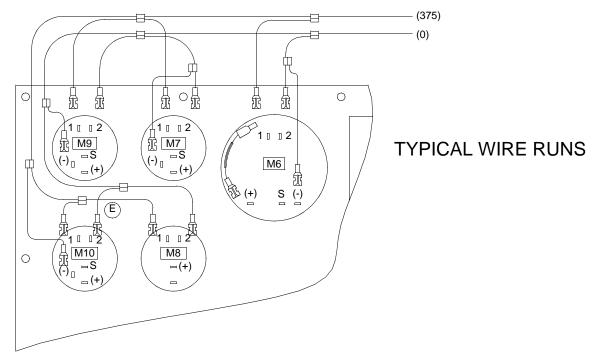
MCS Operator Cab Lower Control Panel Wiring.
